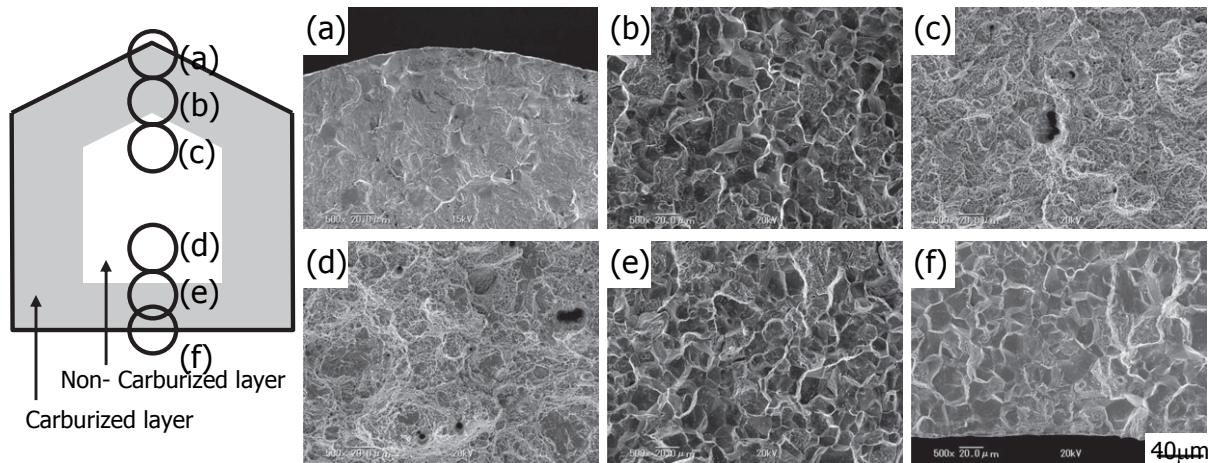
SEM images for fracture surface of vacuum-carburized 150° specimens.
